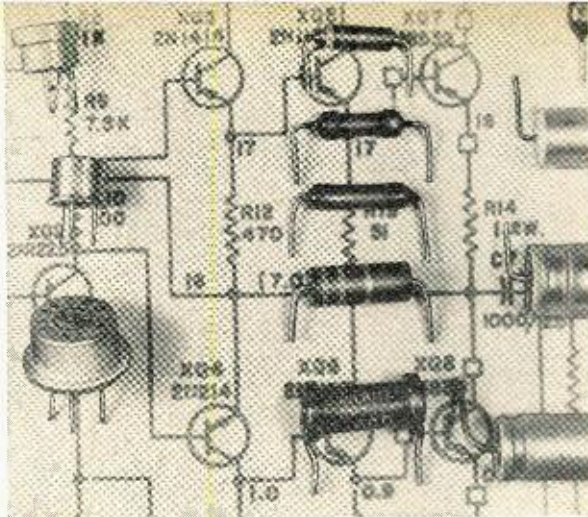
Carefully redraw the schematic for best layout of components, using the actual parts to determine minimum spread between component leads.
